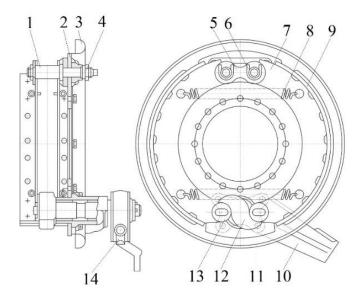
Brake mechanism of the car KamAZ 1-axis pad; 2- caliper; 3- flap; 4-nut axis; 5-lining of axes pads; 6- linchpin axis pad;7-brake pad; 8-spring; 9-friction pad; 10-bracket of the expansion cam; 11-roller's axis; 12- expansion cam; 13-roller; 14-regulating roller
